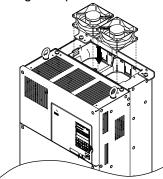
Install the Cooling Fan: 4A0088 and 4A0103
